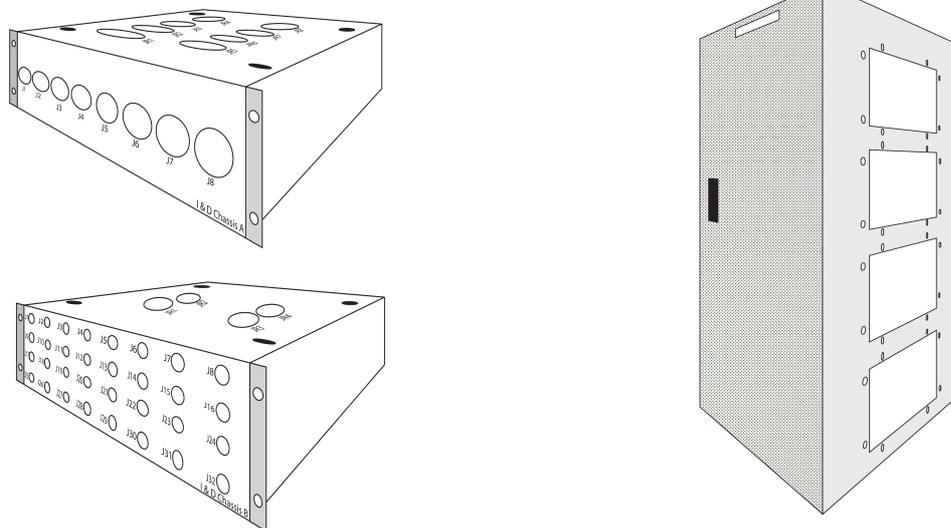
3D drawing of the I&D Chassis (version A on the top, B on the bottom).
